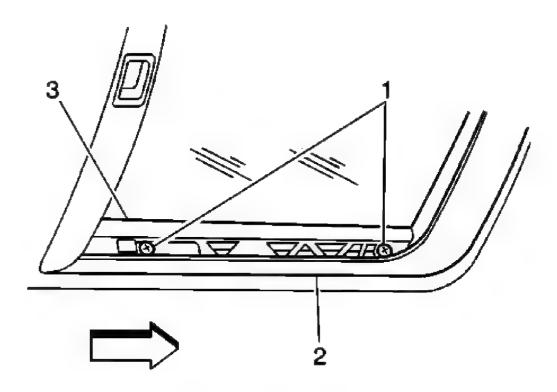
Identifying Sunroof, Housing And Adjusting Screws Courtesy of GENERAL MOTORS CORP.
